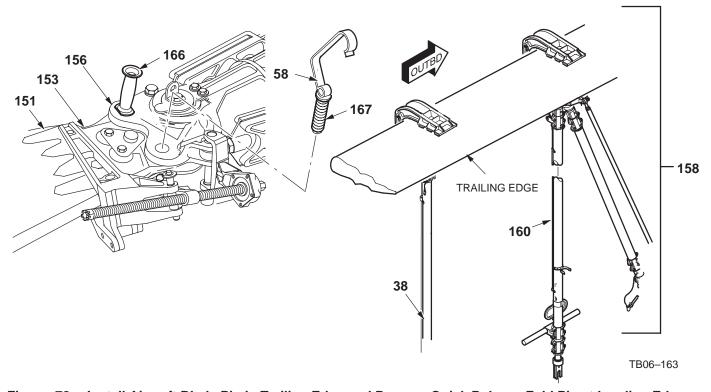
Install Aircraft Blade Pin in Trailing Edge and Remove Quick Release Fold Pin at Leading Edge
